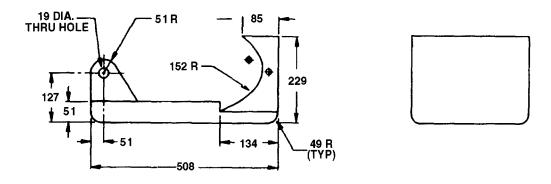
Body Block for Lap Belt All dimensions in millimeters (mm)
